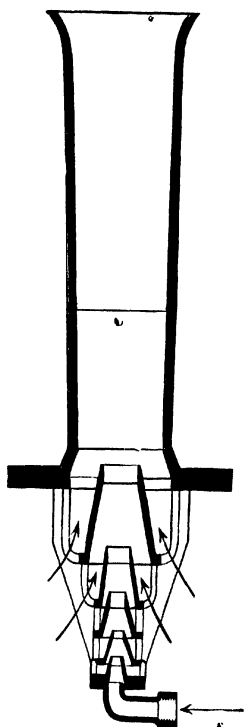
Steam Injector (after Körting), showing steam injector and air entry
